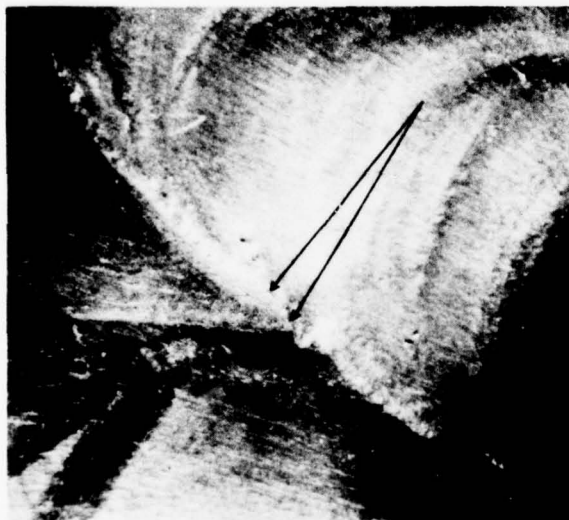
A WELDED ALLOY 718 DIFFUSER CASE.
